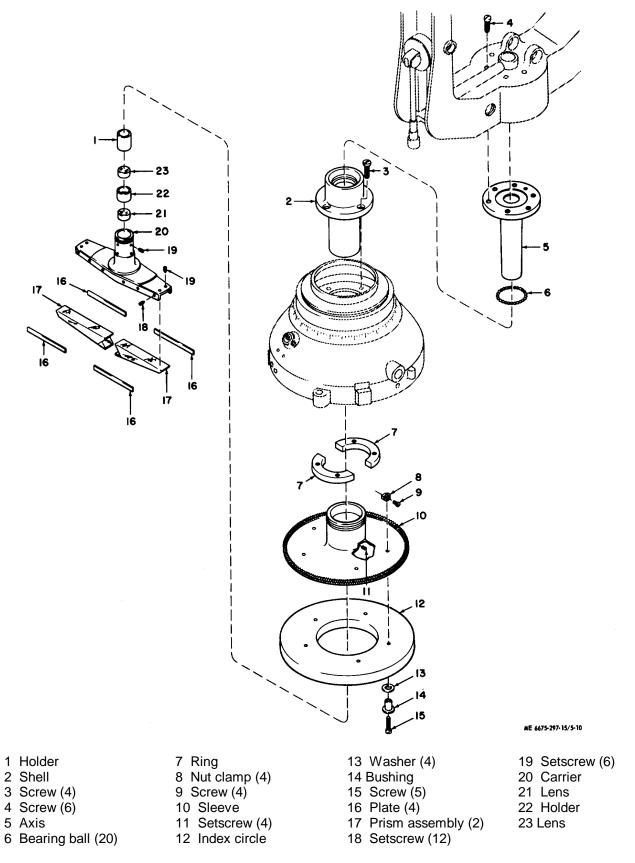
Horizontal circle and vertical axis; removal, disassembly, reassembly, and installation.
